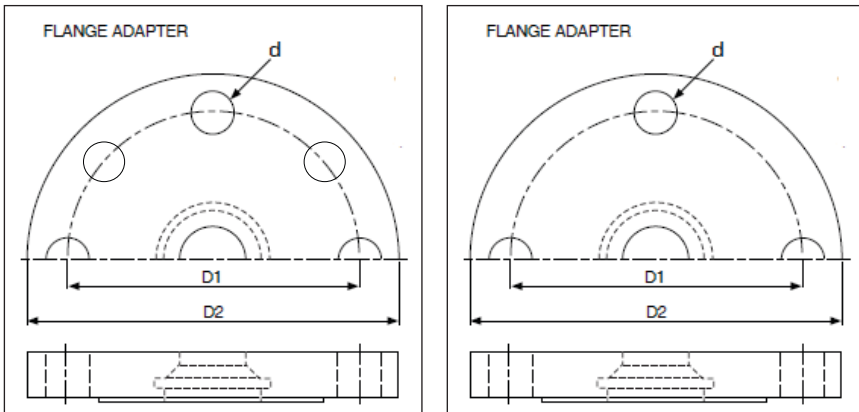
Mounting Procedure ISC40G(S)-GG (TG) with flange adapters
